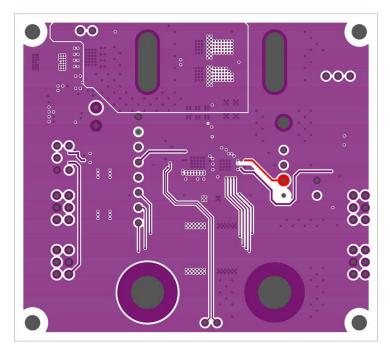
PCB - Inner Layer - Layer 5 (Top View)
